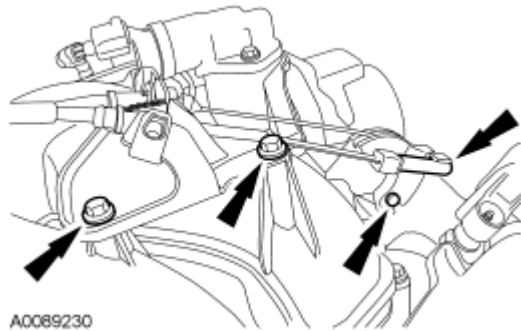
Accelerator Cable, Speed Control Actuator Cable & Cable Bracket Bolts
